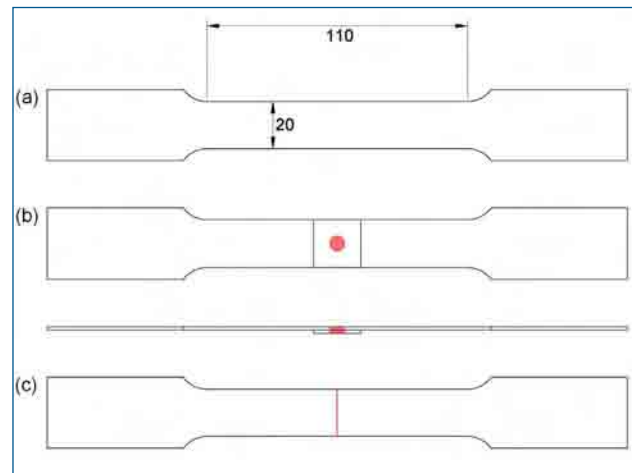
Tensile specimen (a), tensile specimen with one RSW welding spot (b) and tensile specimen with a simulated LW welding line (c), used for both the quasi-static tensile tests and the stress-life fatigue tests.
